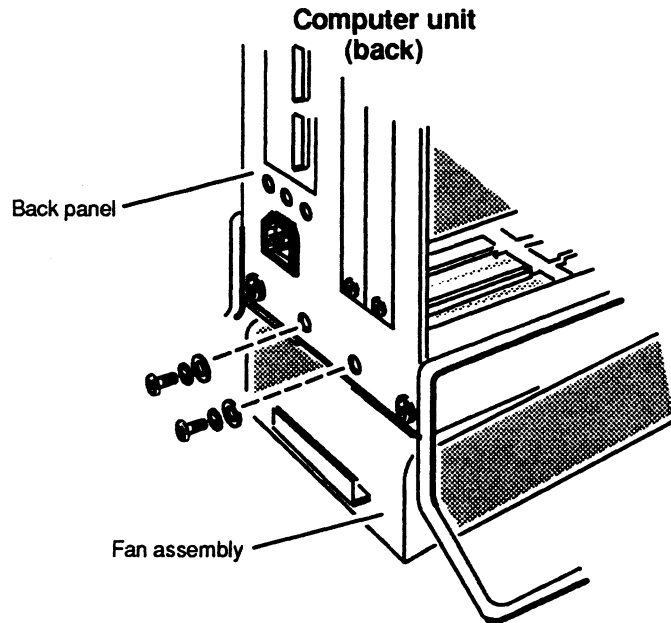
Securing the Fan Assembly from the Back of the Computer Unit
